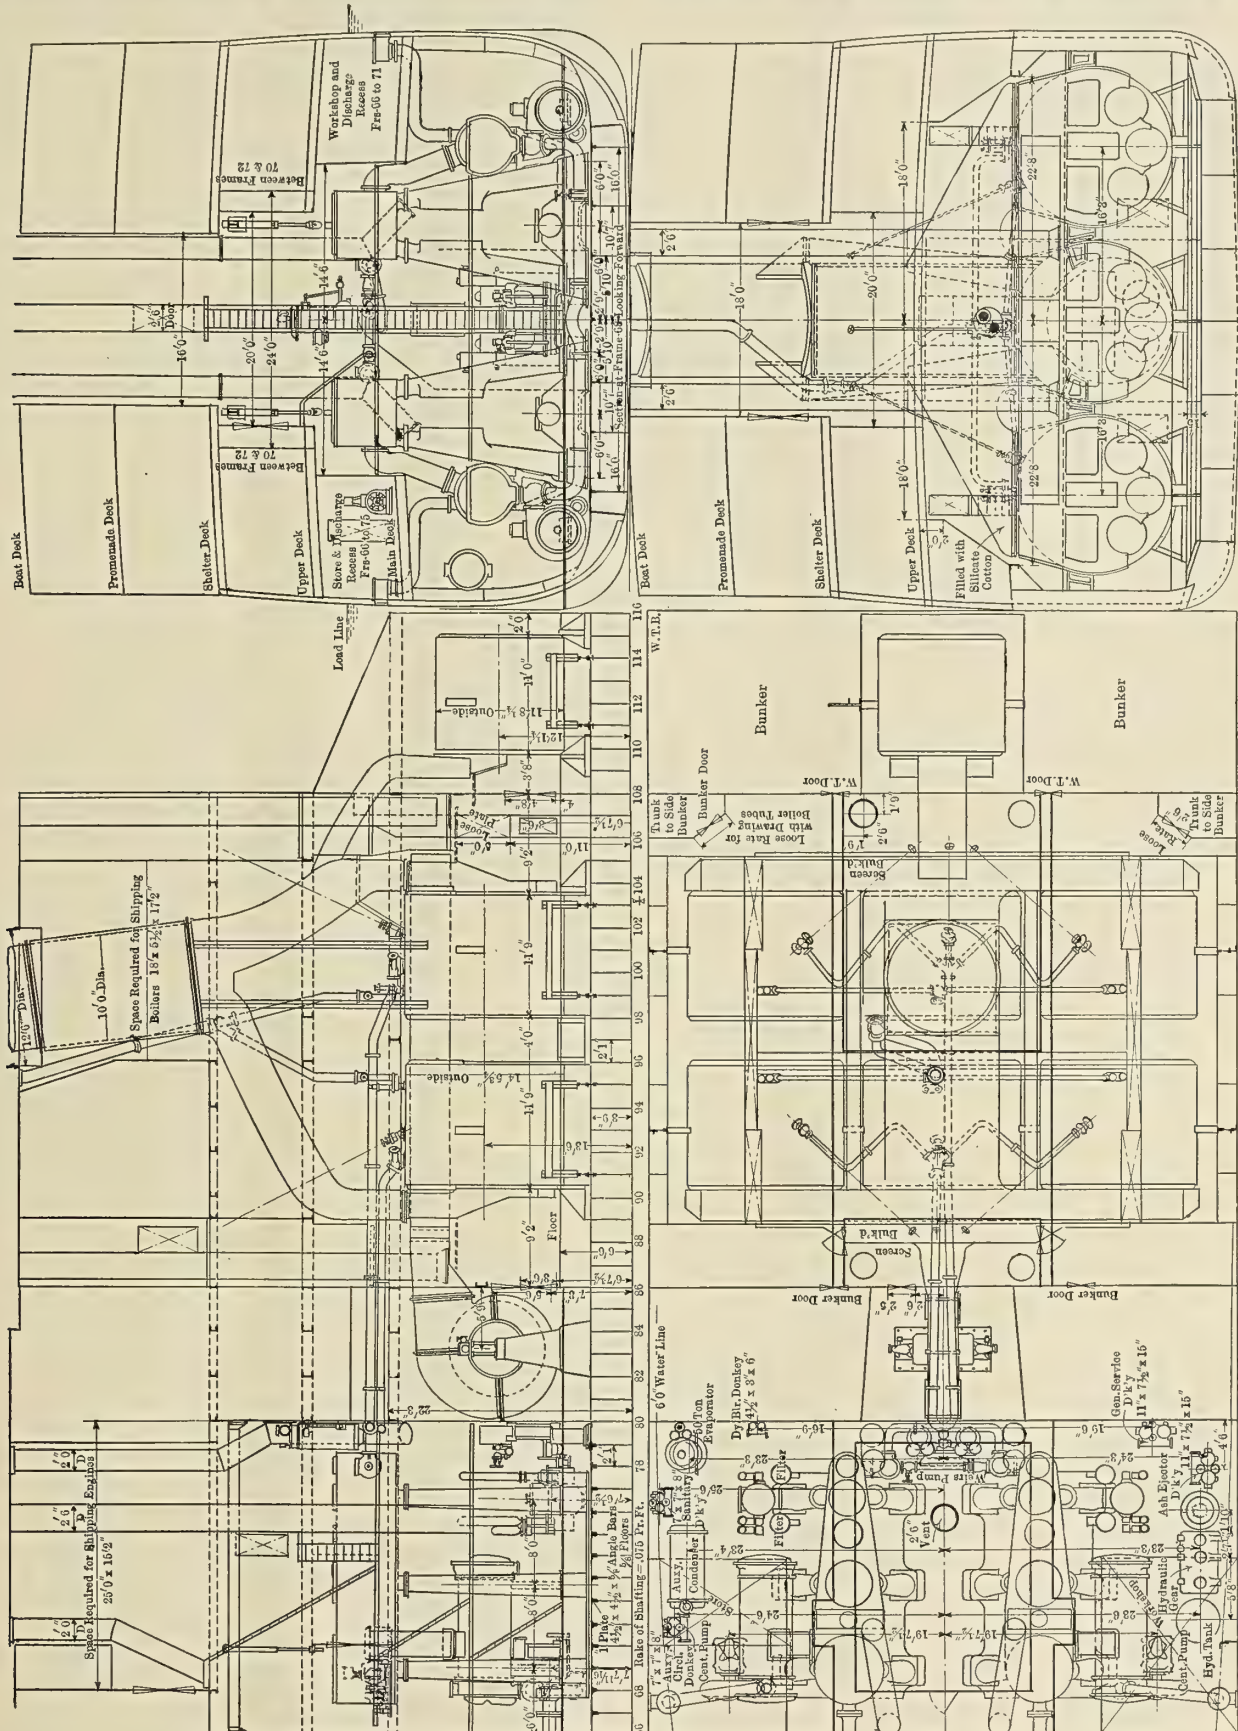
SECTIONS THROUGH MACHINERY SPACE OF THE LISBOA, SHOWING LOCATION OF MAIN AND AUXILIARY MACHINERY.
